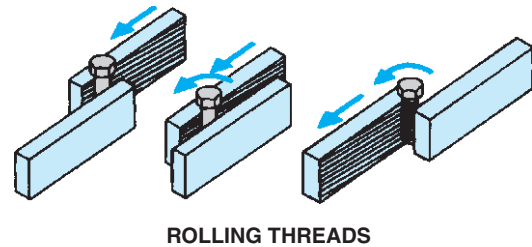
Stronger threads are created by cold-rolling a heat-treated bolt blank instead of cutting the threads using a die.
